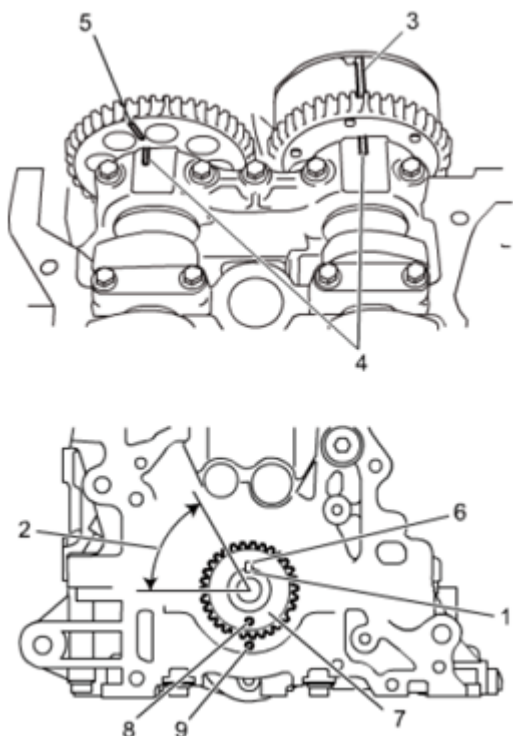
Removing Timing Chain And Crankshaft Timing Sprocket
